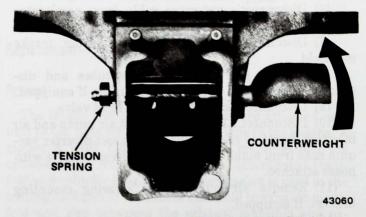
K-10 Heat Valve in Heat OFF Position—Six-Cylinder
